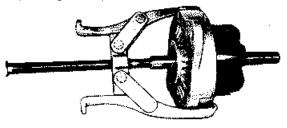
Remove four screws and bearing retainer; press bearing and seal out of drive end housing.
